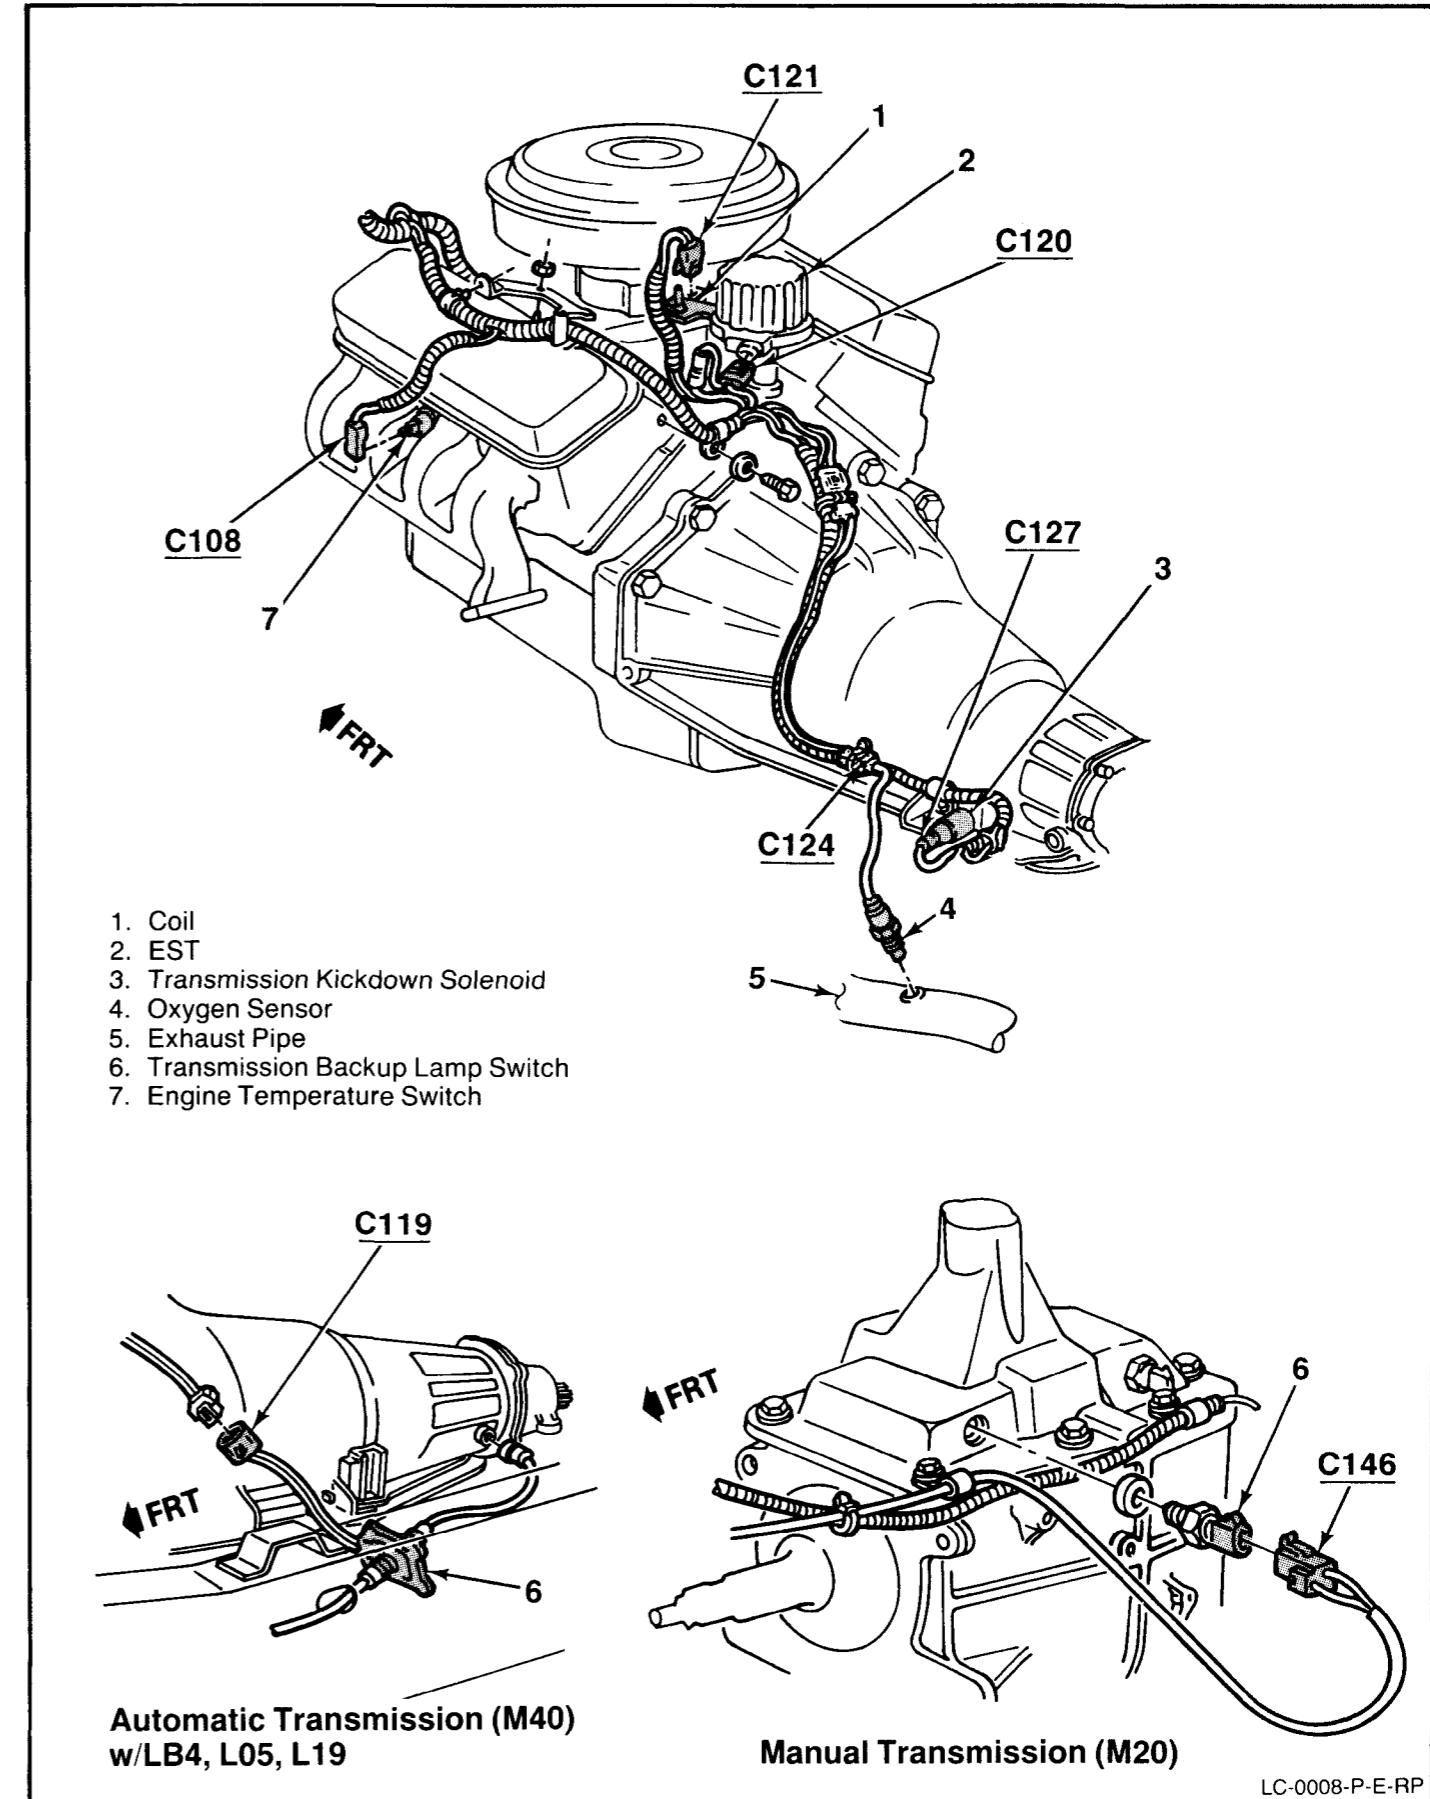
Engine Wiring Harness, LH Side (RPO L19 w/P42)
